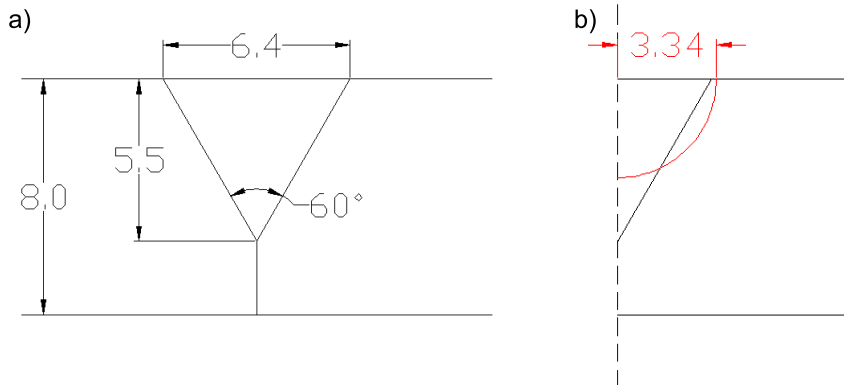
a) Weld geometry used in Karlsson and Josefson [19], b) Dimensions of the heat source in the model
